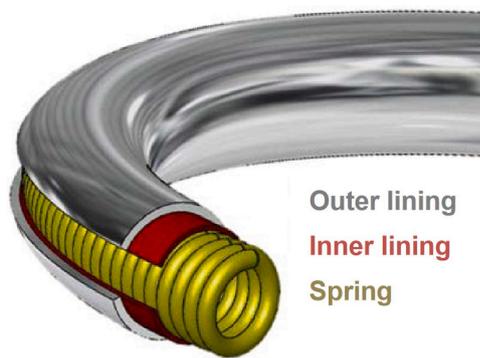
Sketch of a spring-loaded C-ring gasket (courtesy Technetics).
